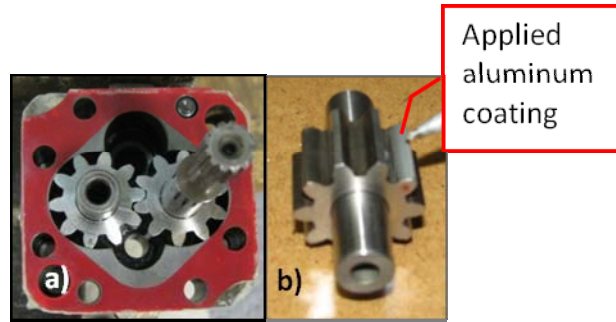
a) Gear pump sub-assembly, b) Metal coating applied to one gear tooth for simulated fault test
